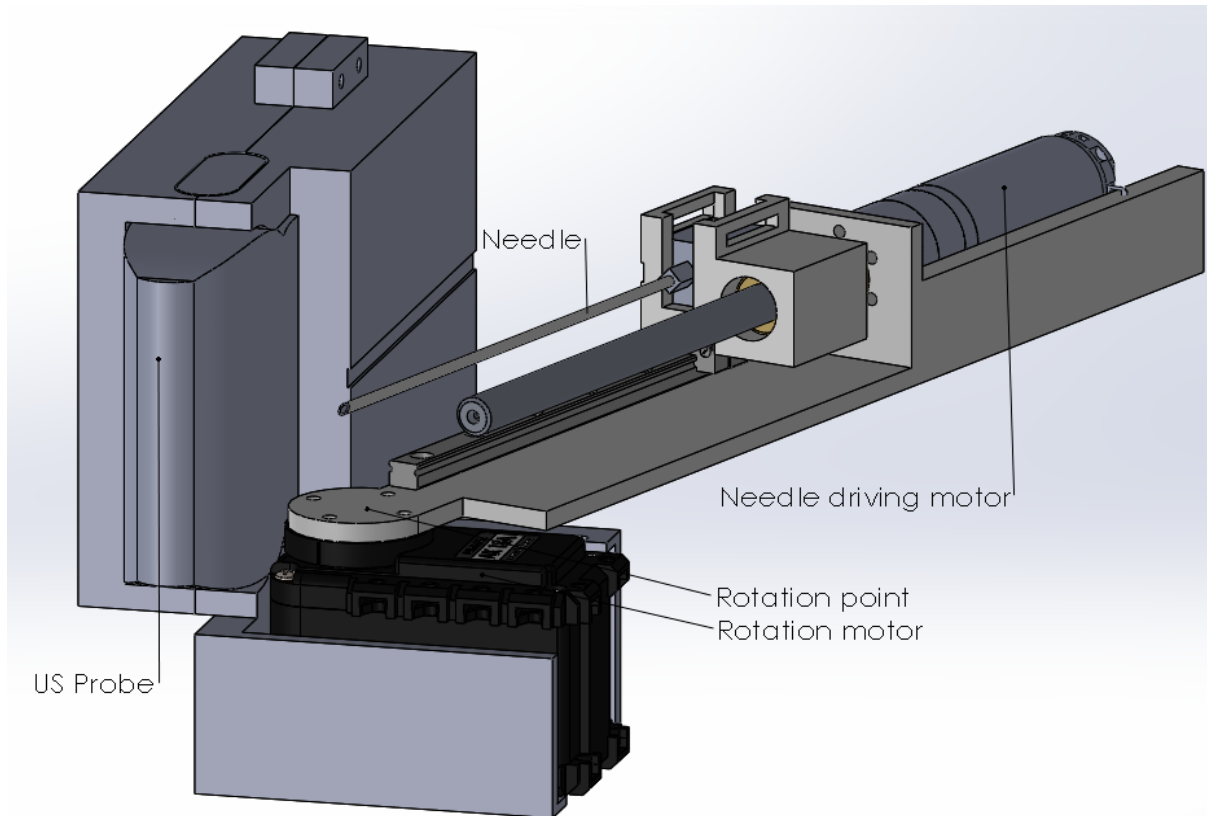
Design of needle driver and ultrasound probe angle control without gears
